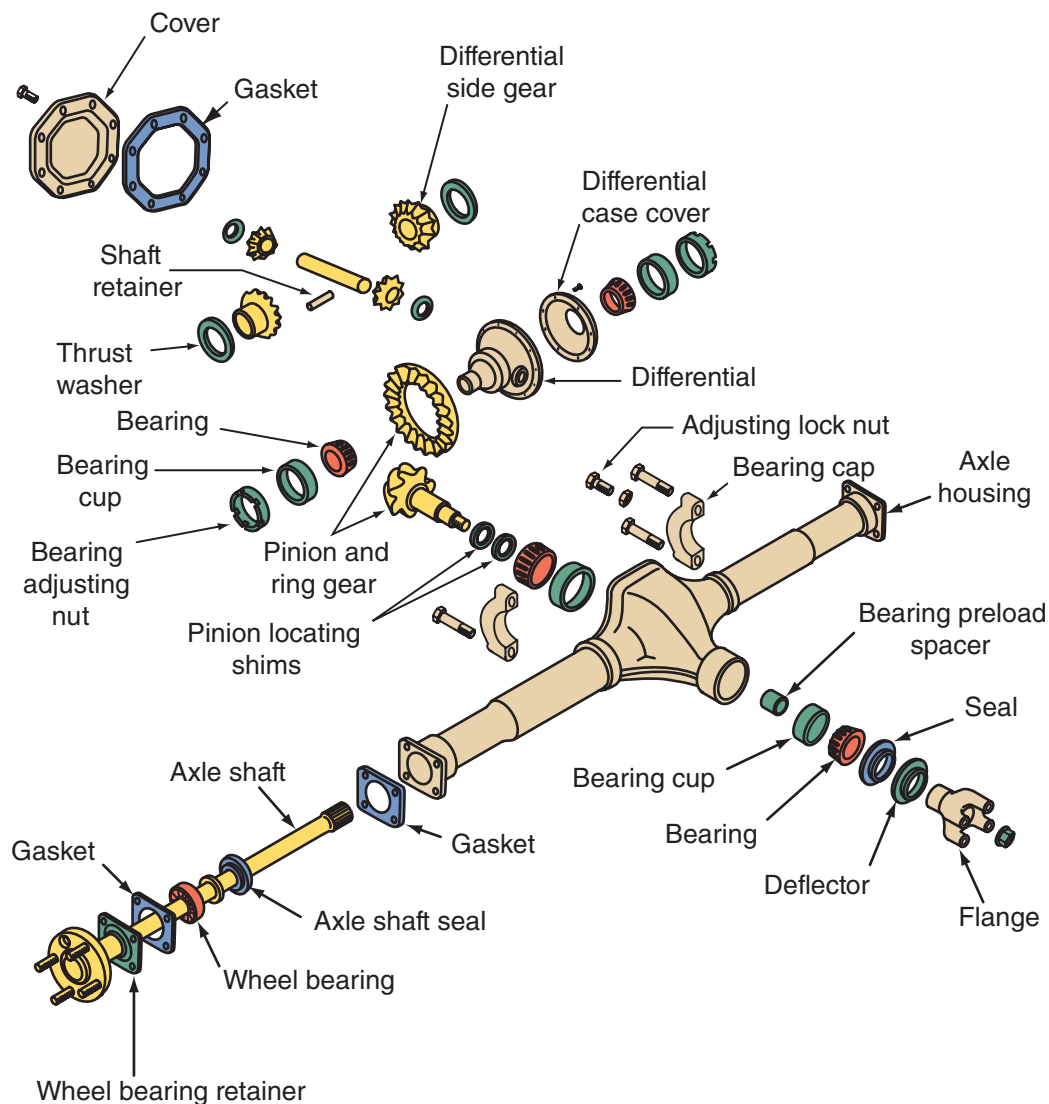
An exploded view of an integral-carrier axle housing with a hypoid final drive assembly and semifloating axles.
